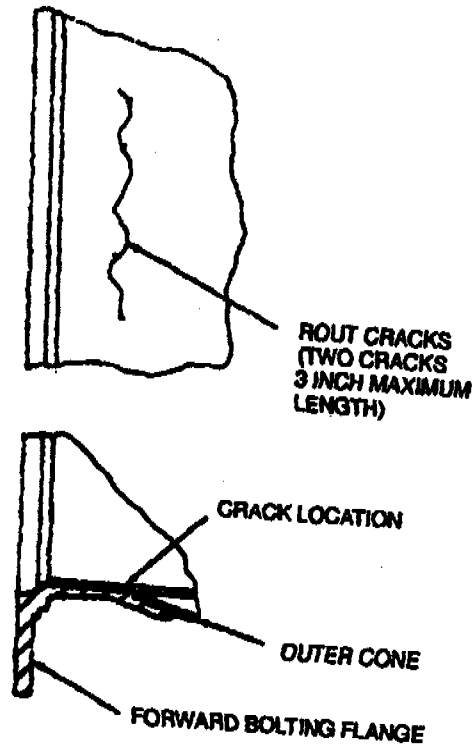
Exhaust Diffuser Outer Cone Crack Locations.
